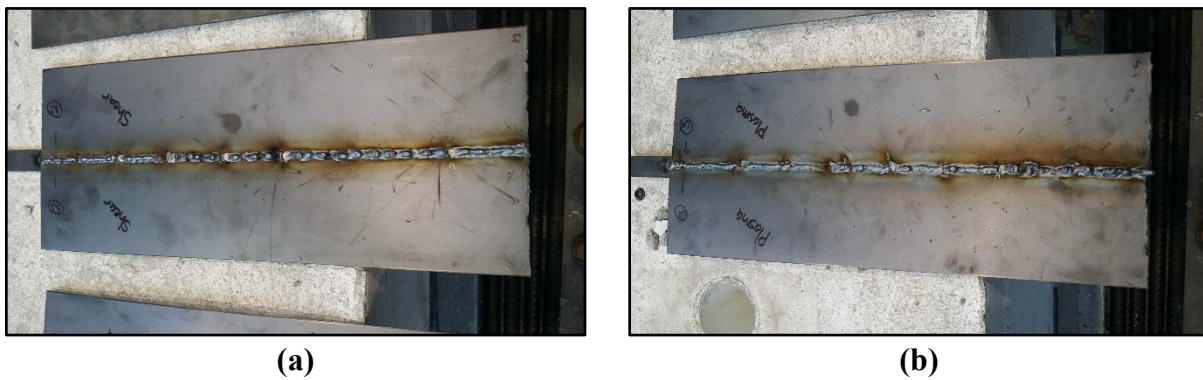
Welded plate specimens from which test coupons were fabricated (a) Shear cut; (b) Plasma cut.
